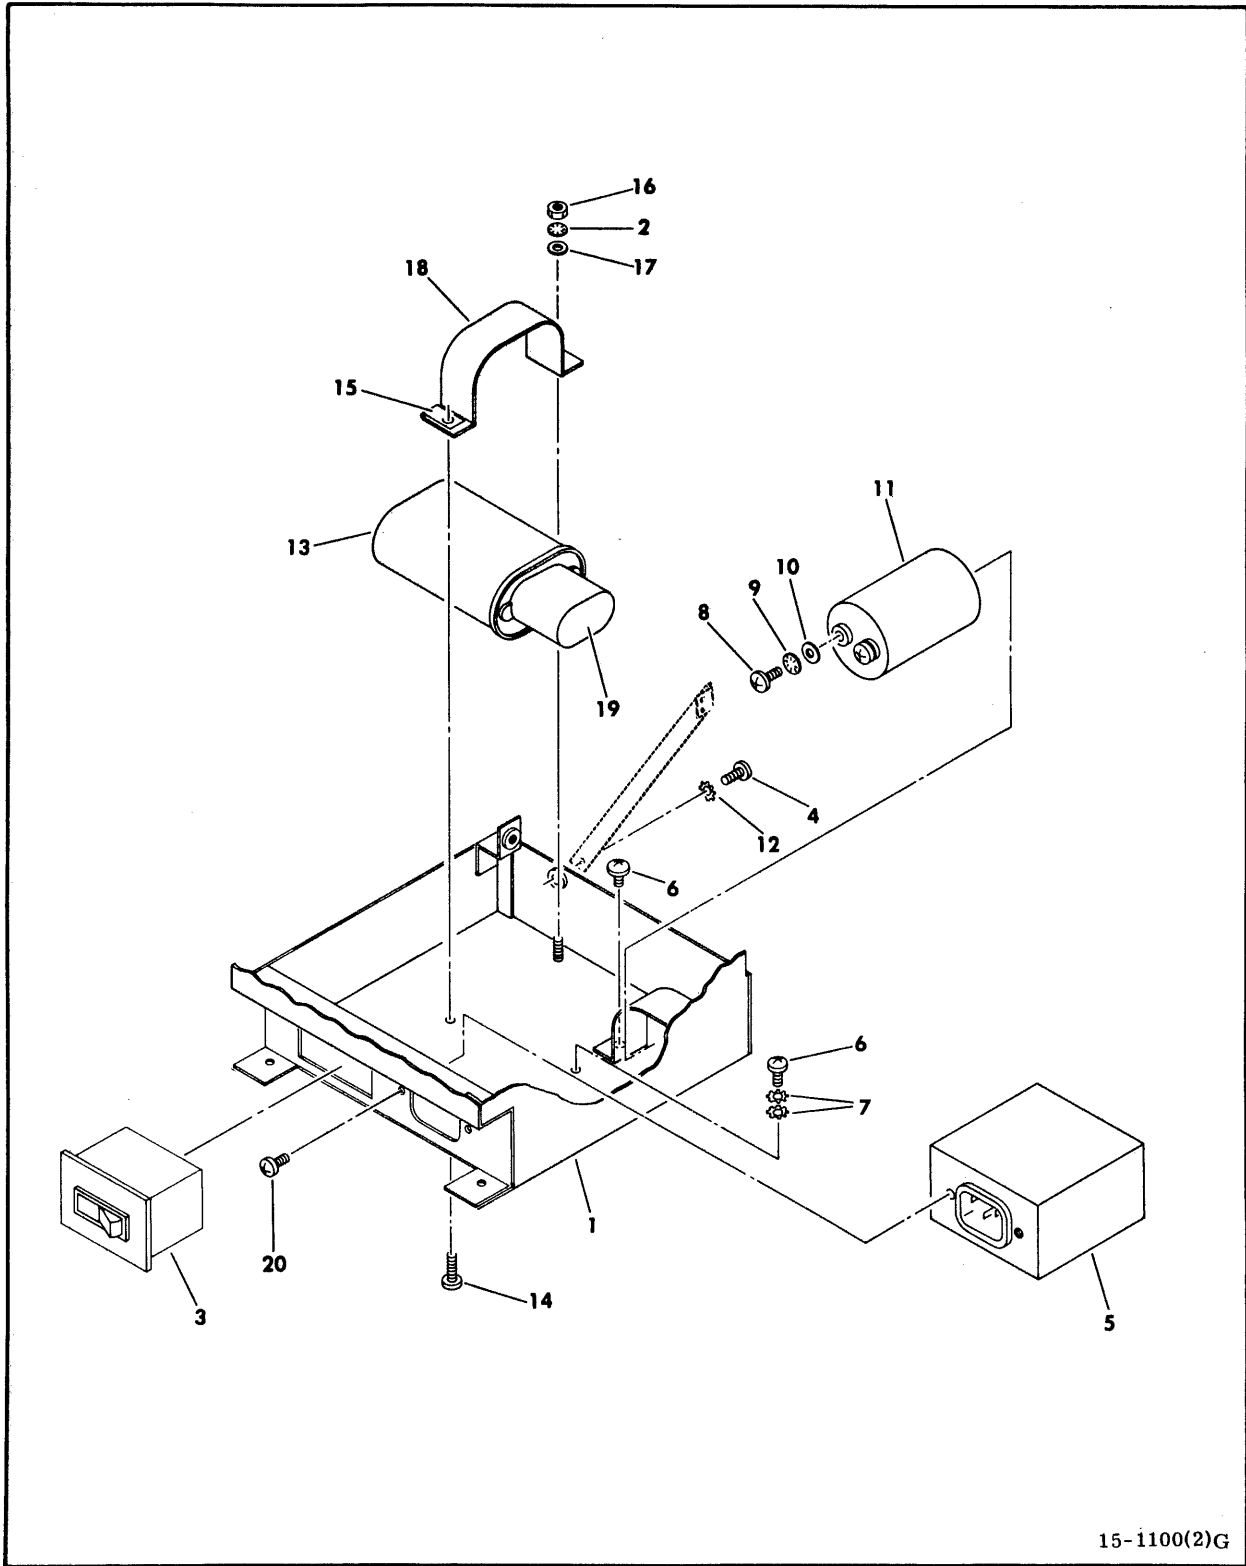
Power Supply Assembly (Sheet 1 of 2)
